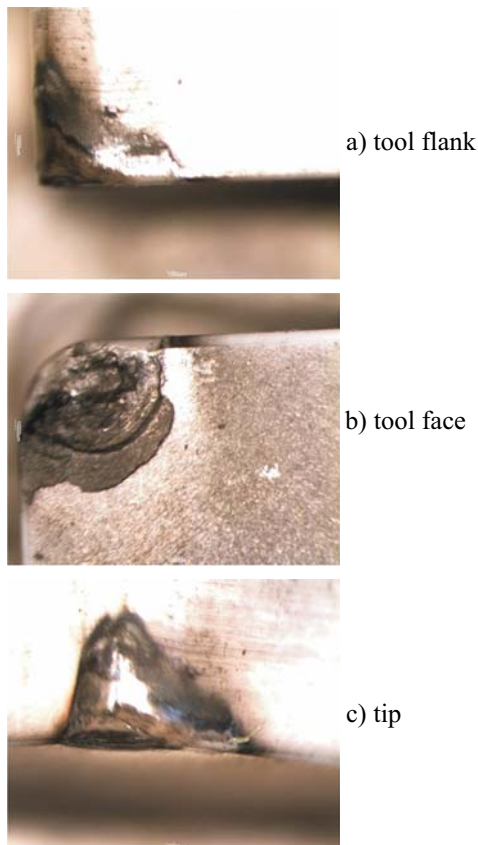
Tool wear – indexable cutting insert type D 250\_4
